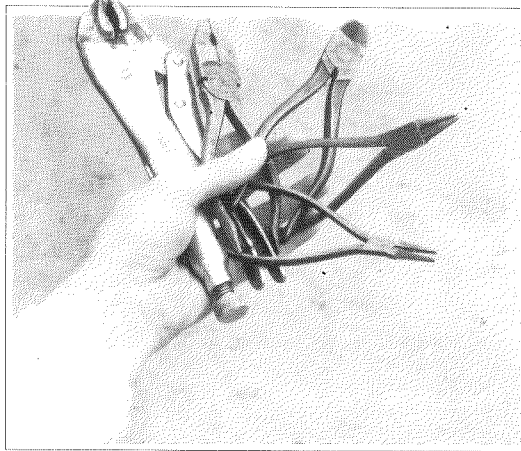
Pliers: vice type of different sizes including a selection of welding clamps (the more the better), 'standard', electricians', wire cutters, pointed, crocodile...
